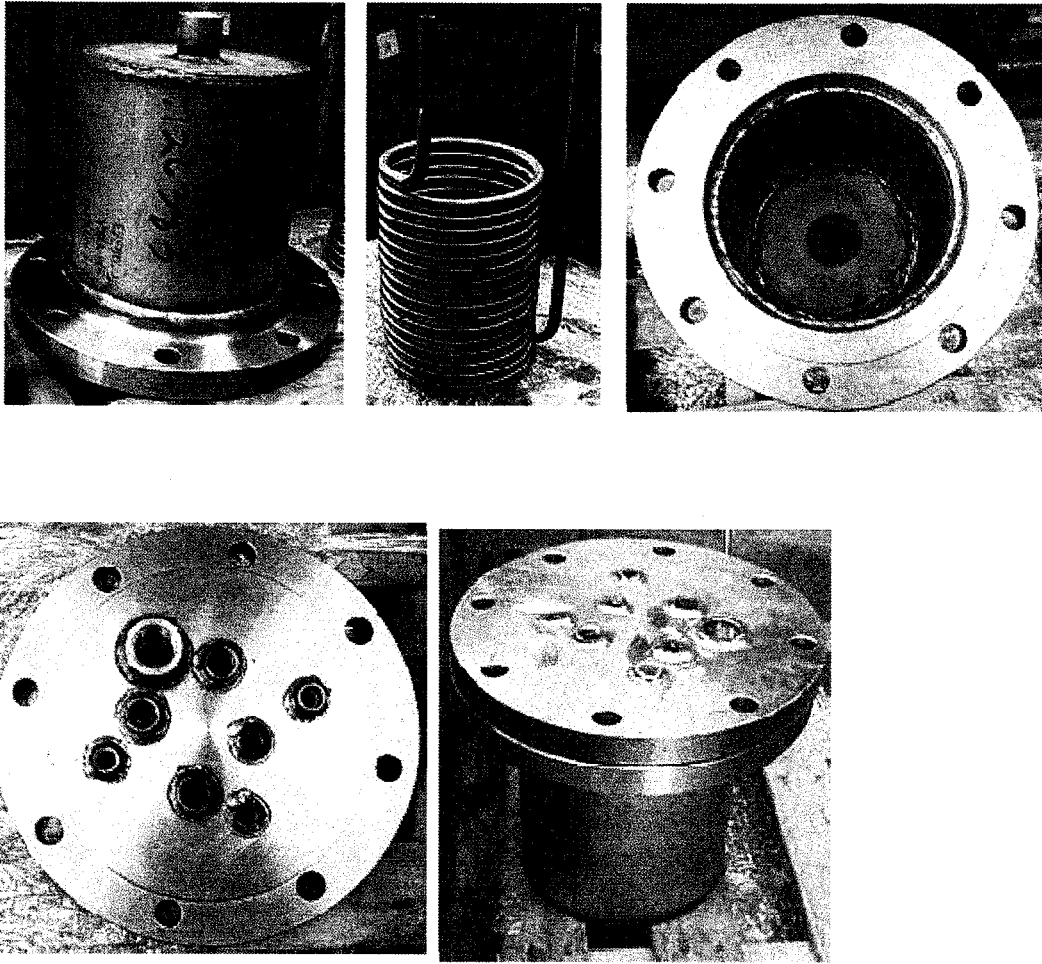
Pictures Showing the Pre-Assembly Components of the Feed Vessel with the Cooling Coils and Other Ports. (Post-Fabrication)
